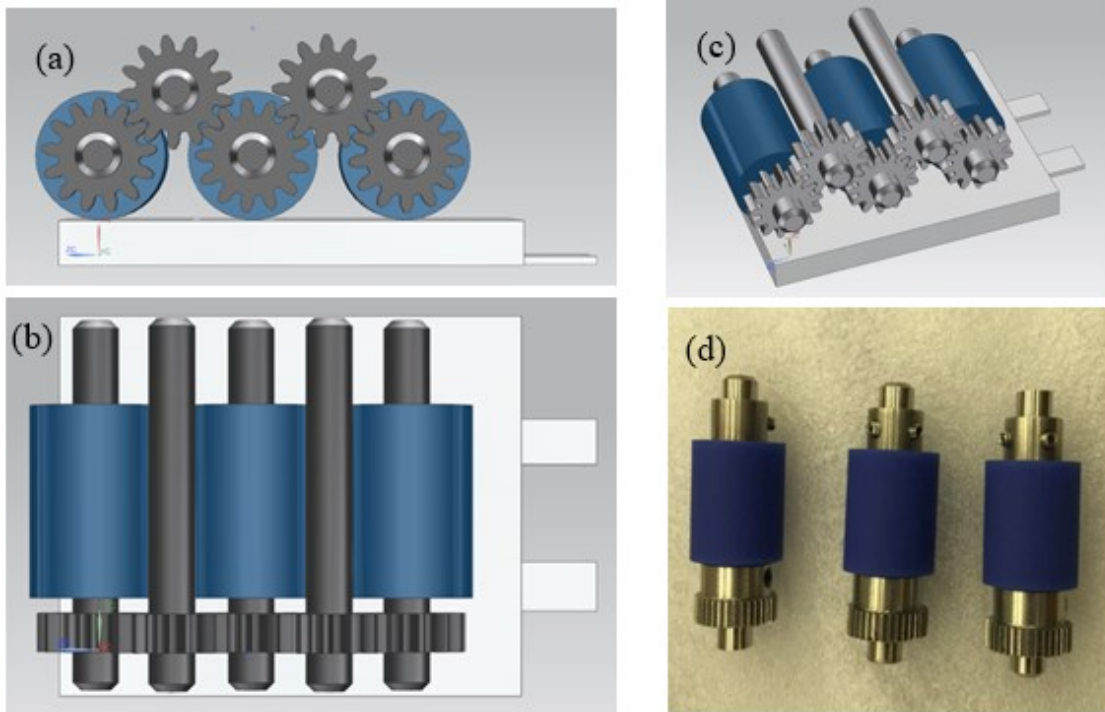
Detailed design of the pinch roller conveyor set: (a) side view in CAD model, (b) top view in CAD model, (c) assembly overview in CAD model, and (d) top view of prototyped pinch rollers.
